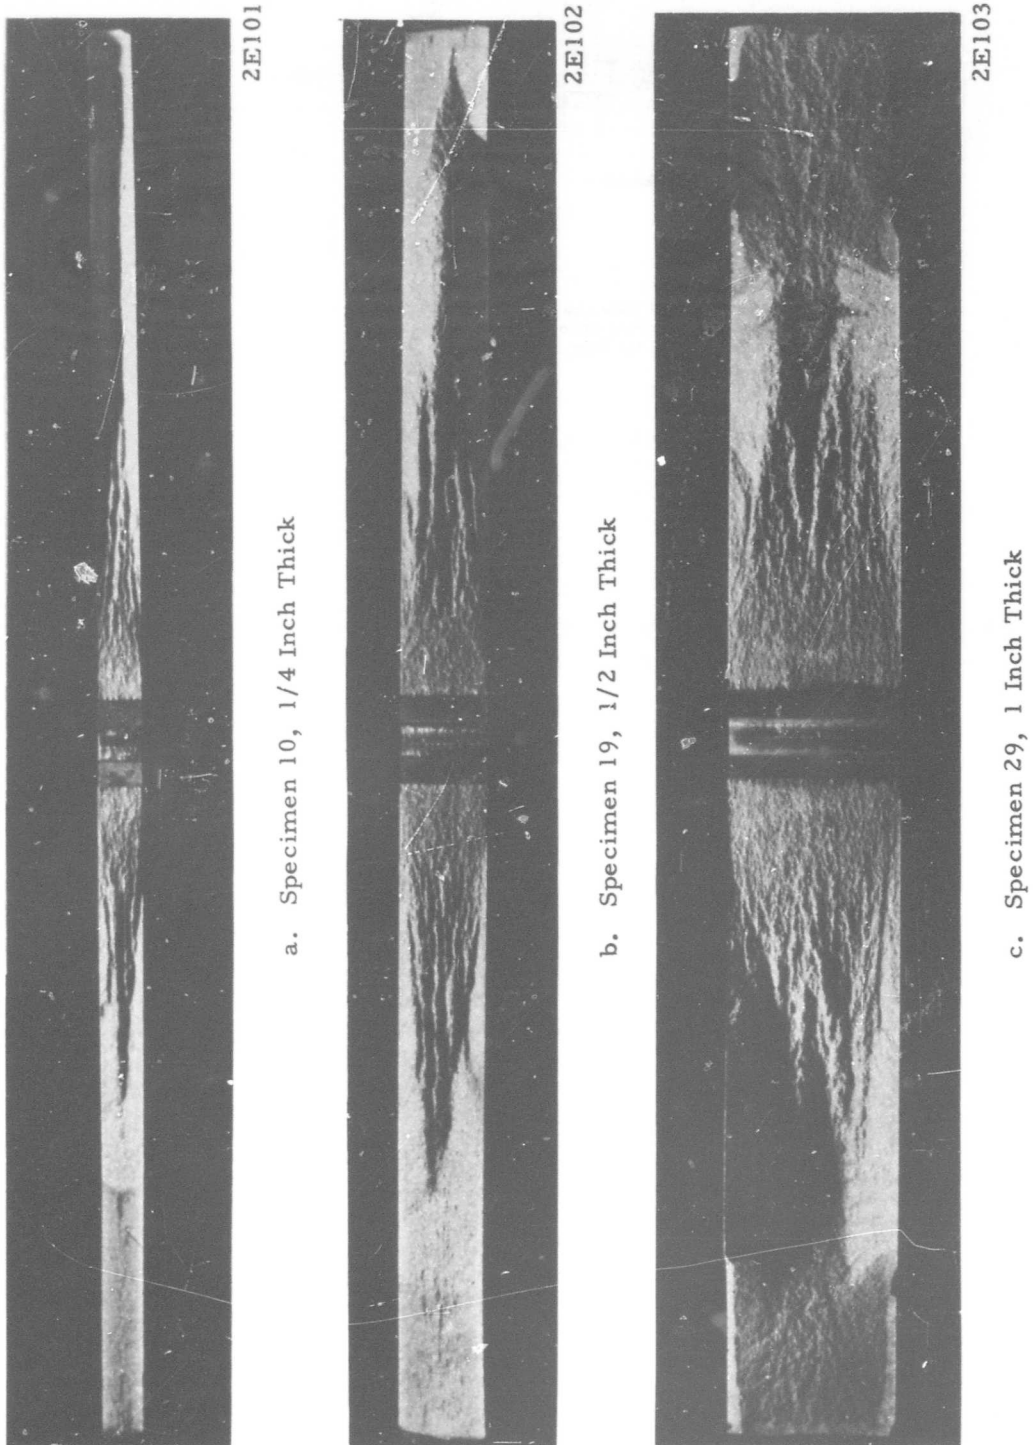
TYPICAL FRACTURE SURFACES OF FATIGUE-CRACK PROPAGATION SPECIMENS
